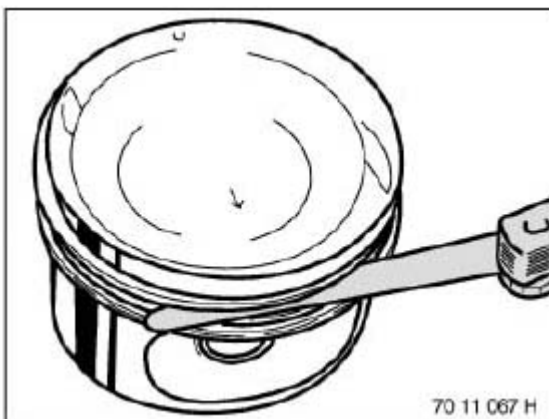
Measuring Axial Clearance Of Piston Rings In Piston Ring Groove
